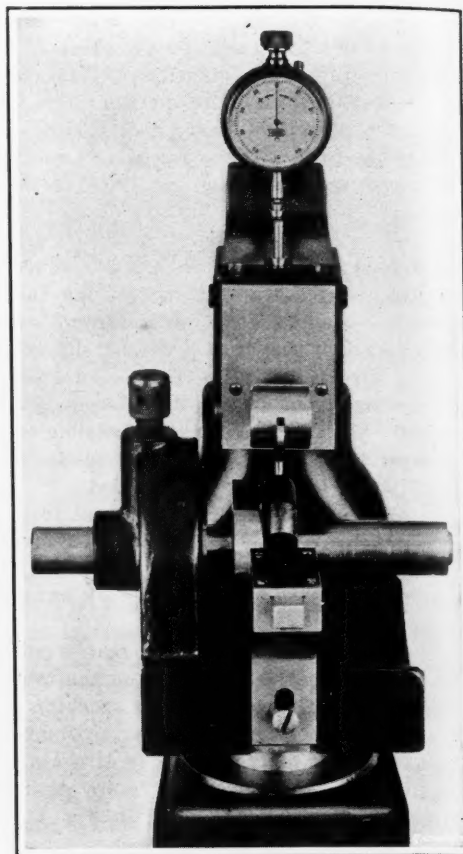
Davie Gaging Machine with Attachment for testing Concentricity of Gear Cutters, etc., shown in Operation
